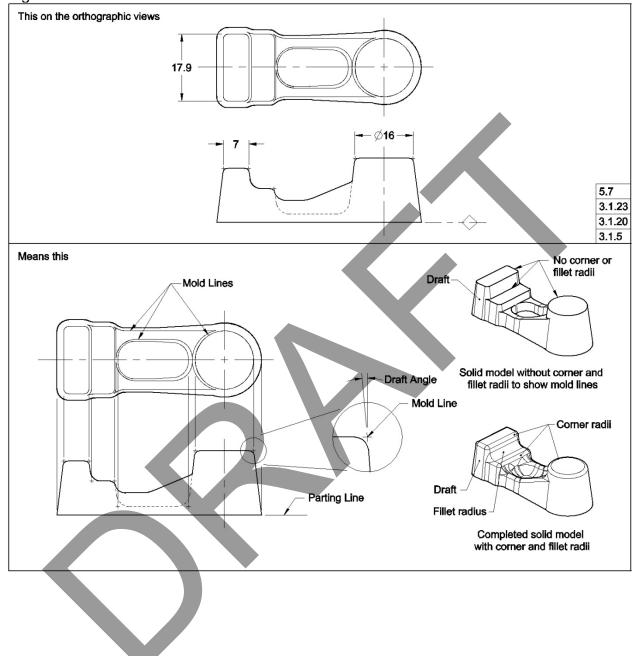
Boss Circular Mold Line and Mold Line Center Point
